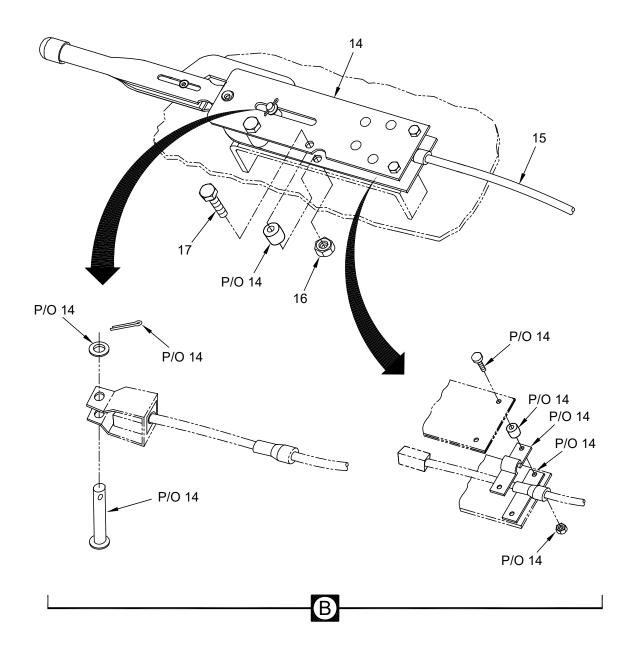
Chassis - Brake Installation, TG421-9006G, TG421-9006T (Sheet 3 of 5).
